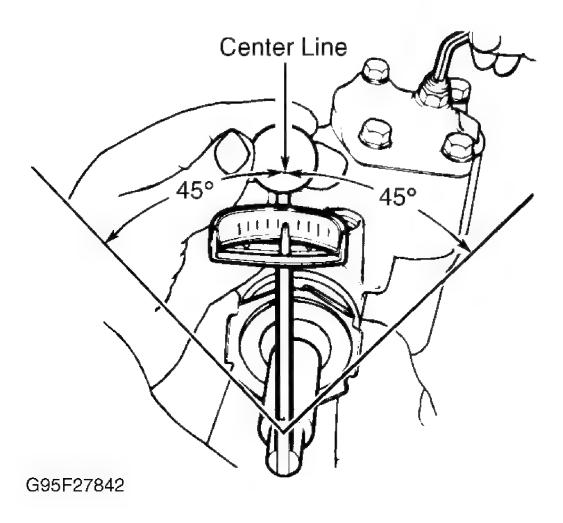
Adjusting Over-Center Preload Courtesy of GENERAL MOTORS CORP.
